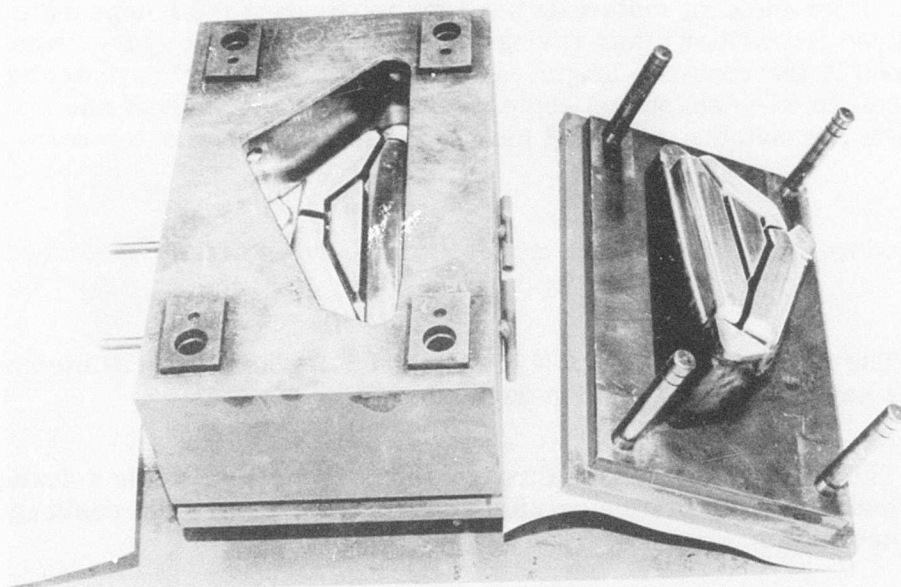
Matched-Die Steel Tooling for Aft Bell Crank.
